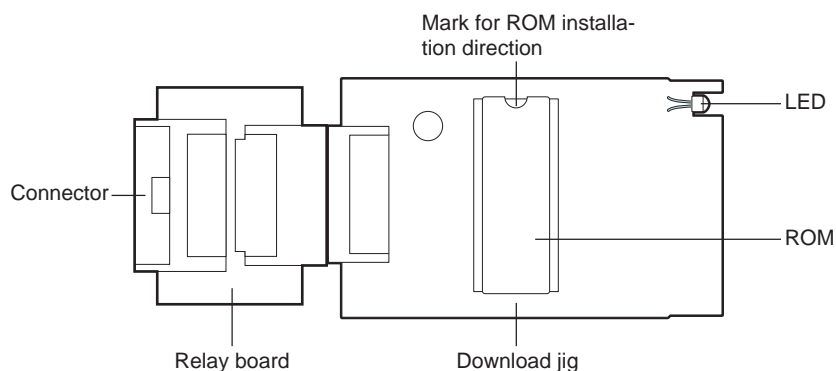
[Jig board: K-PWA-DLM-320]
